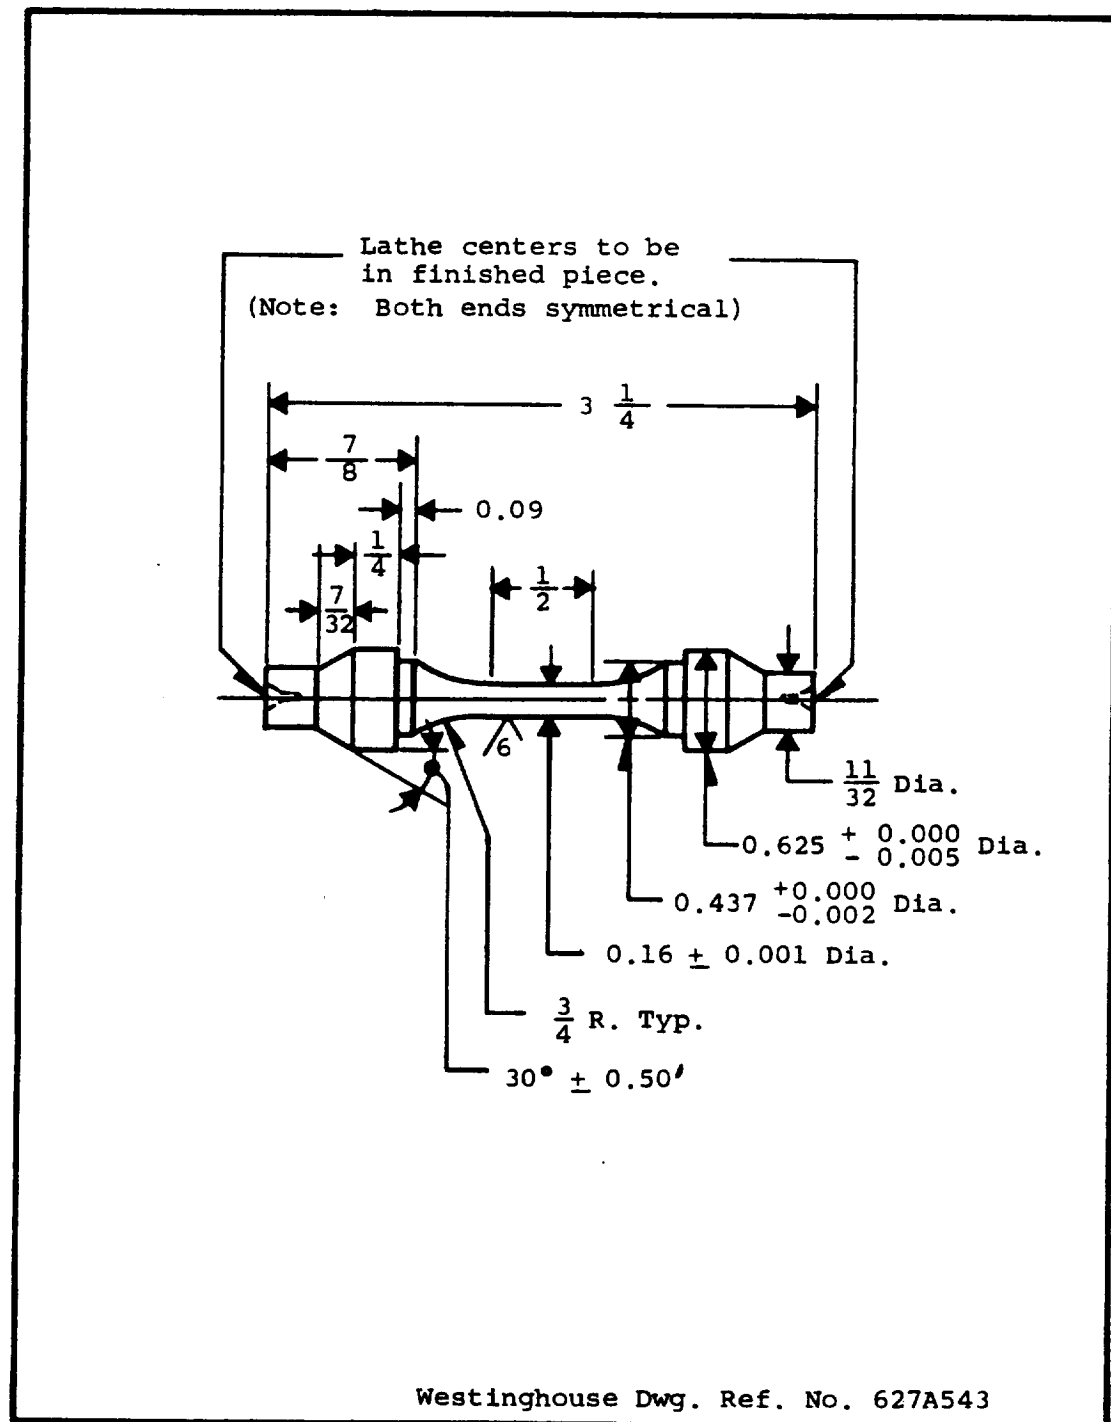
Axial Fatigue Specimen - Smooth Bar
